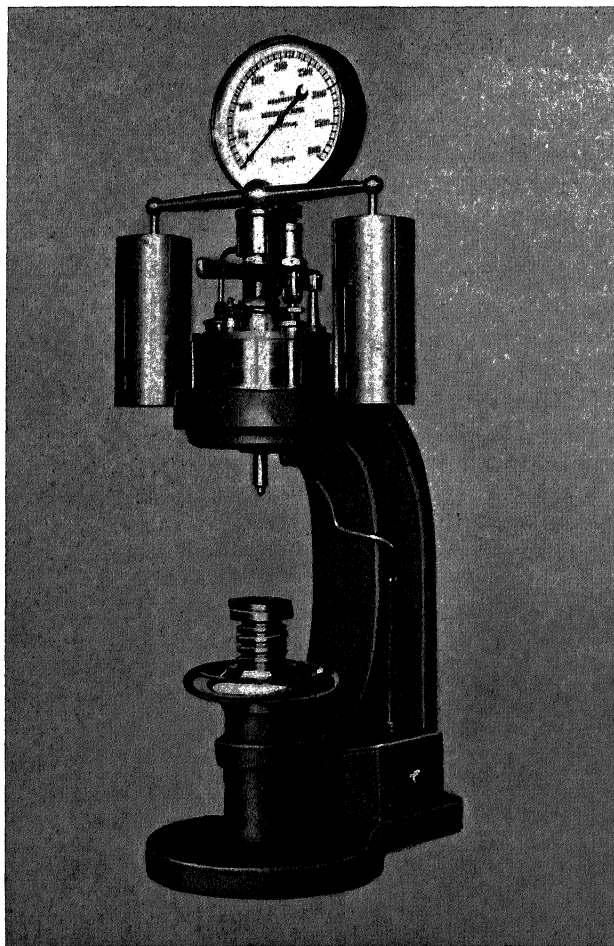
Aktiebolaget Alpha Brinell Hardness Testing Machine
